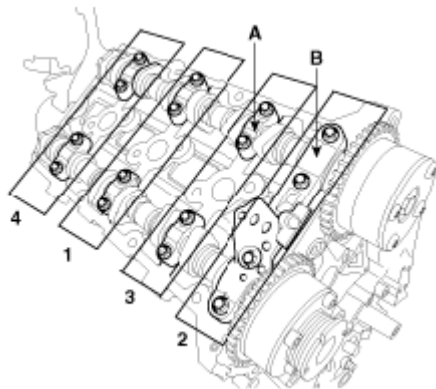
Identifying RH Camshaft Bearing Cap & Thrust Bearing Cap
